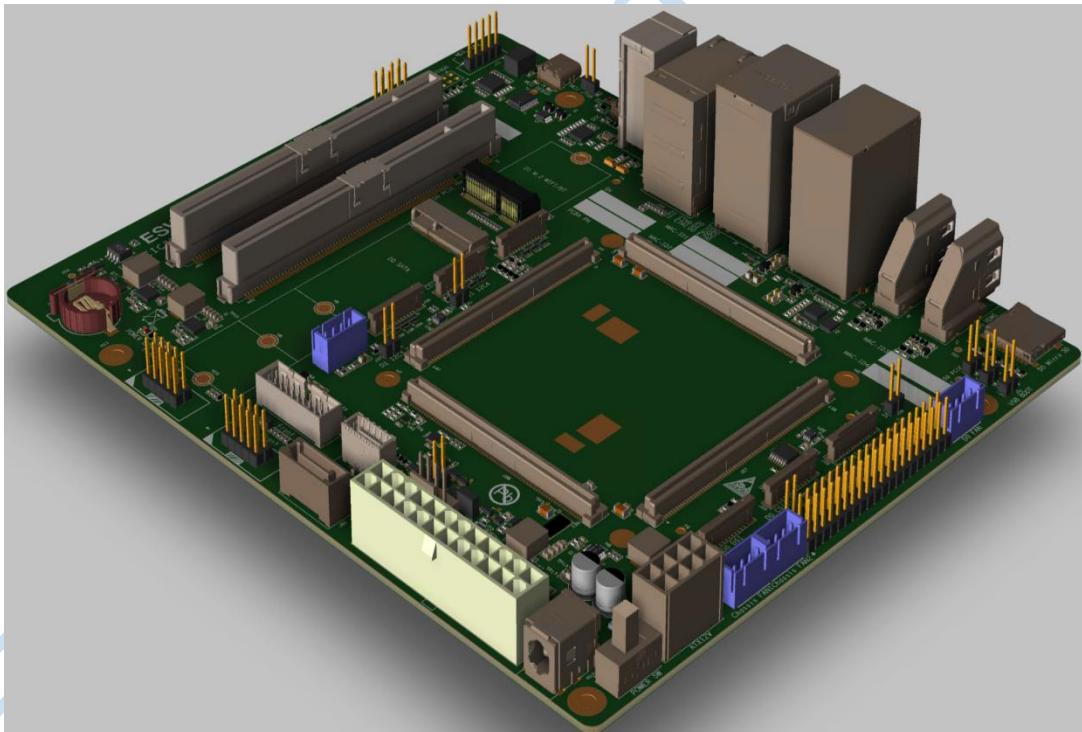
EBC7702 Development Board Carrier Board Effect Picture
